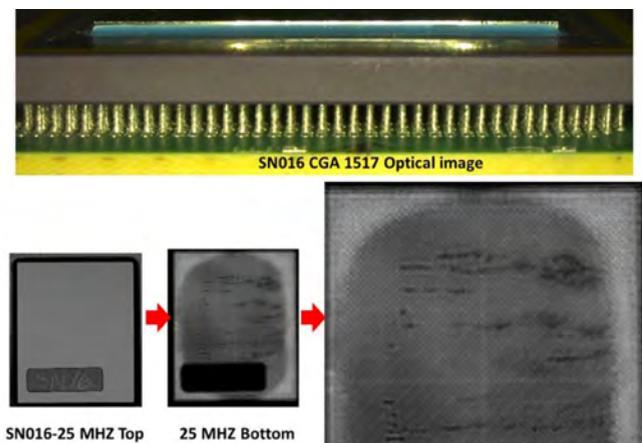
Optical and C-SAM (at 25 MHz) layering images for FC-CGA 1517 assembly (SN016) showing flip-chip top and flip chip bump interface. This package had no heat sink.
